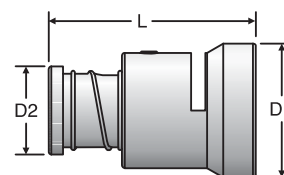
Captive O-Ring Assembly Tool dimensions
